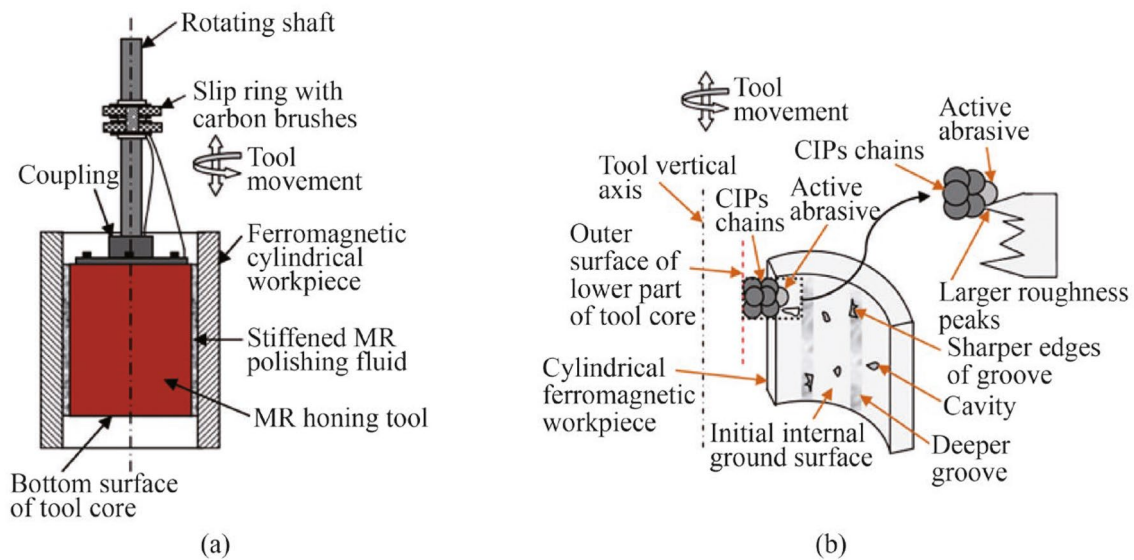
Rotation-type magnetorheological polishing [181] a working principle, b material removal mechanism
